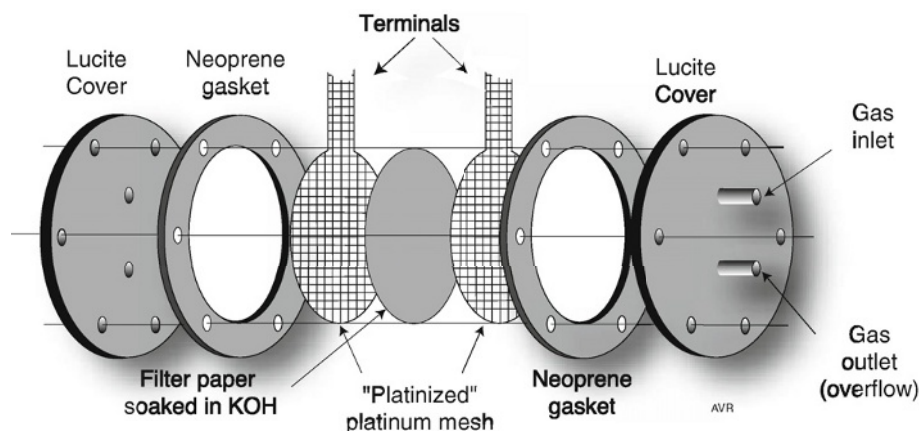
Exploded view of a demonstration fuel cell.
